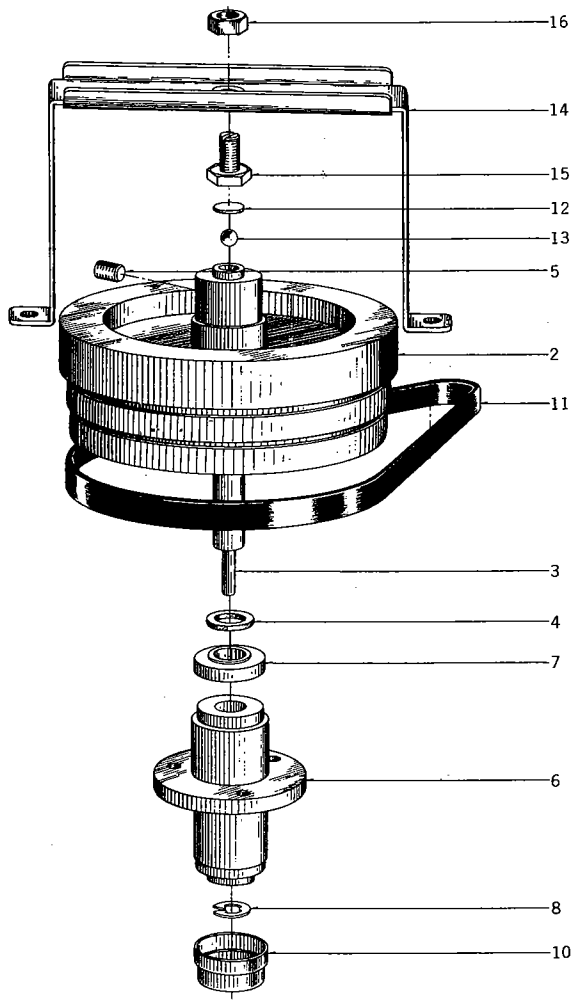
ILLUSTRATION OF MOTOR/BELT CHANGE LEVER BLOCK
